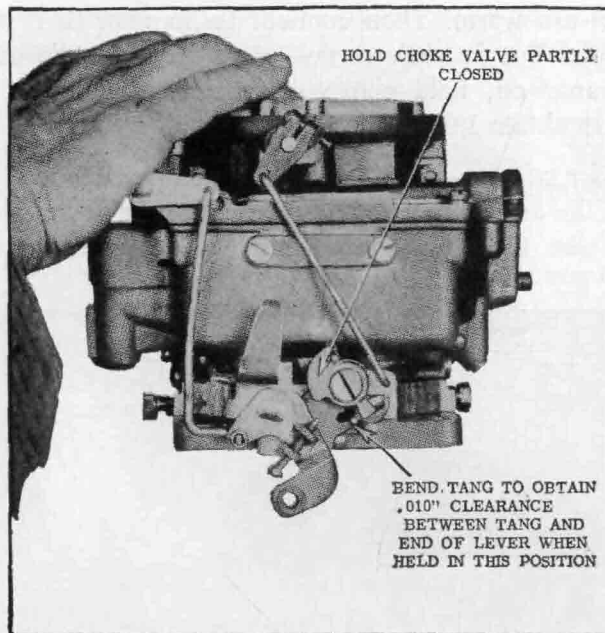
Lockout adjustment. (Oldsmobile Division of General Motors Corporation)
